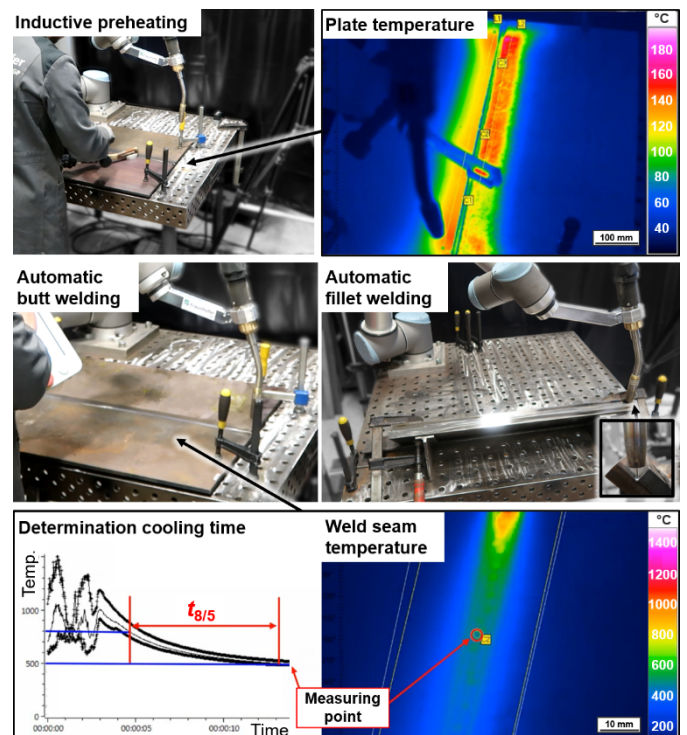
Welding of samples with preheating and measurement of cooling time
